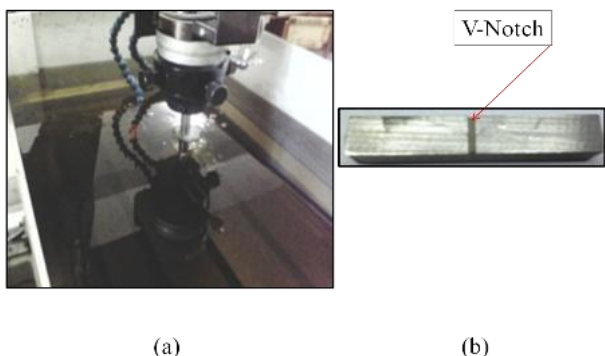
(a) Preparation of V grooves in the specimens by EDM, (b) V groove prepared in the specimen by the machine.
